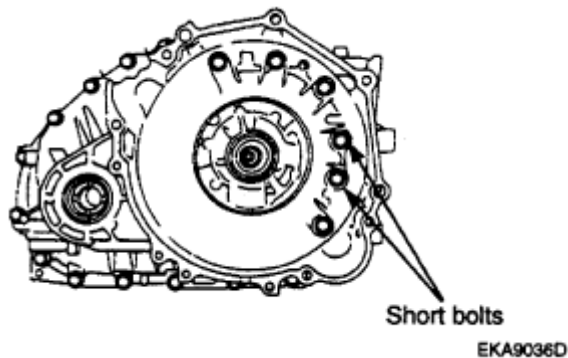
Locating Low & Reverse Brake Discs And Plates
